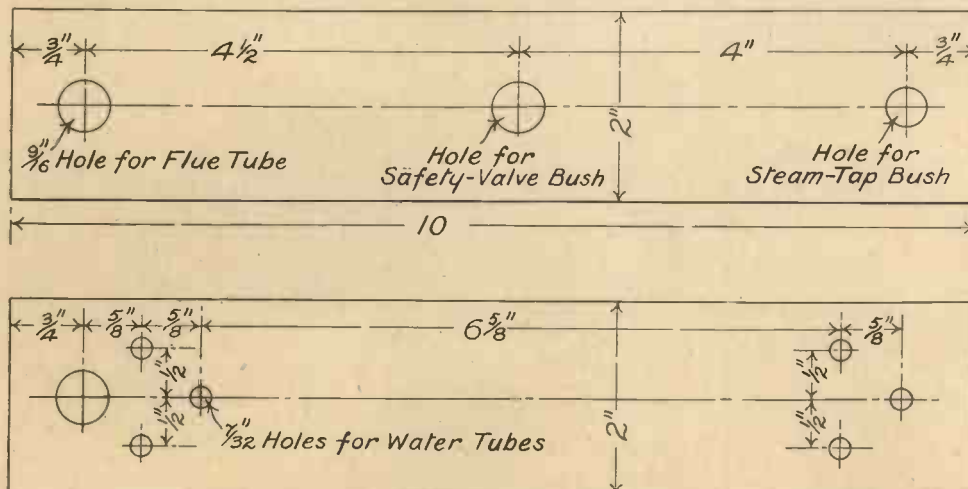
(Left) A plan and underside view of the inner boiler barrel.
